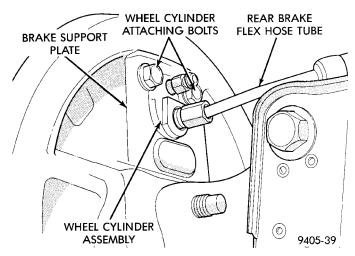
Brake Flex Hose Tube At Wheel Cylinder
